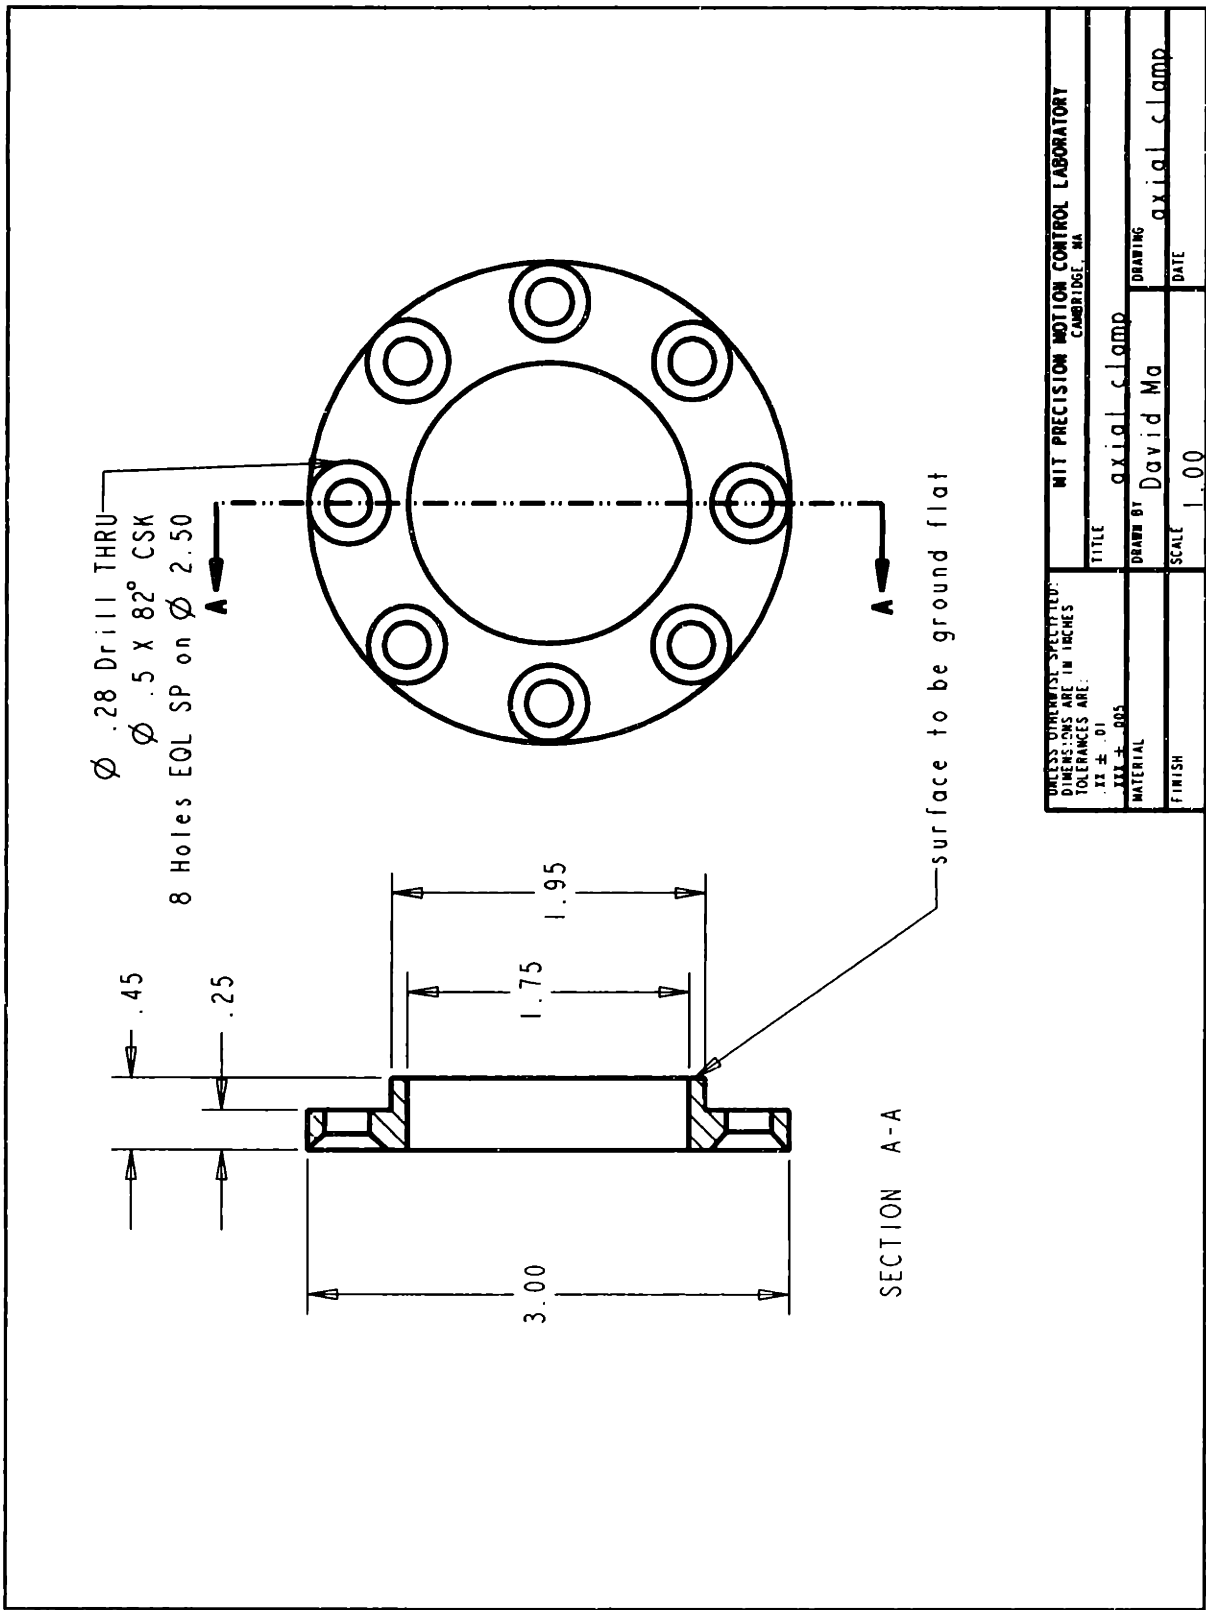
Drawing of the axial clamp for the thrust bearings.
